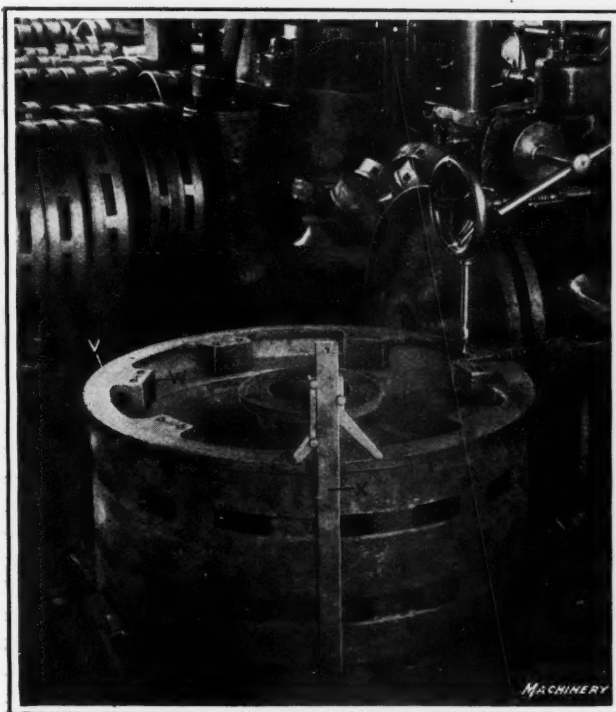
Vertical Drilling Machine for drilling Holes at Opposite Side of Wheel in Accurate Alignment
